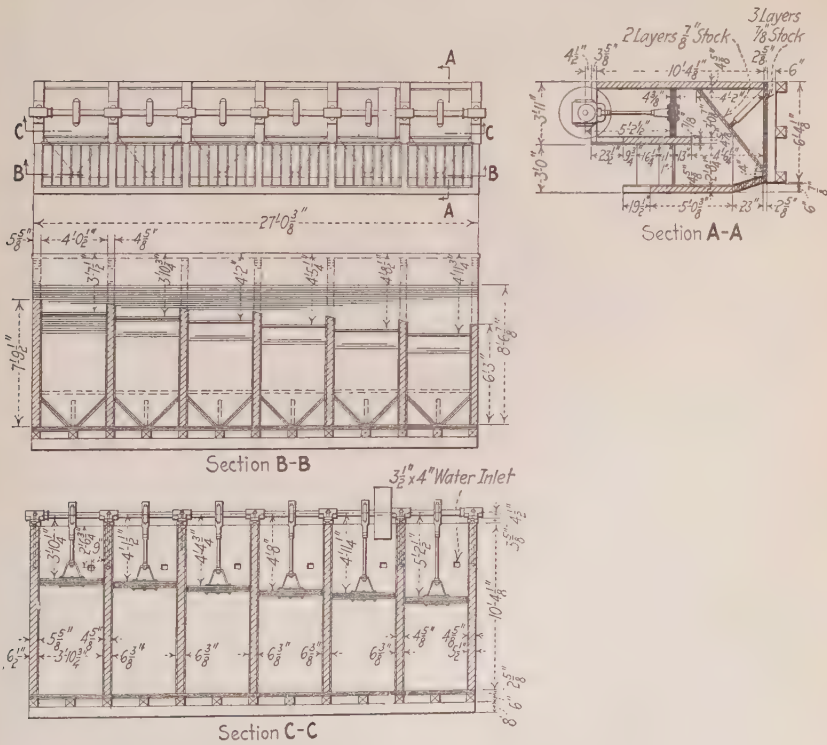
DETAILS OF SIX-CELL ROUGHER JIG.
